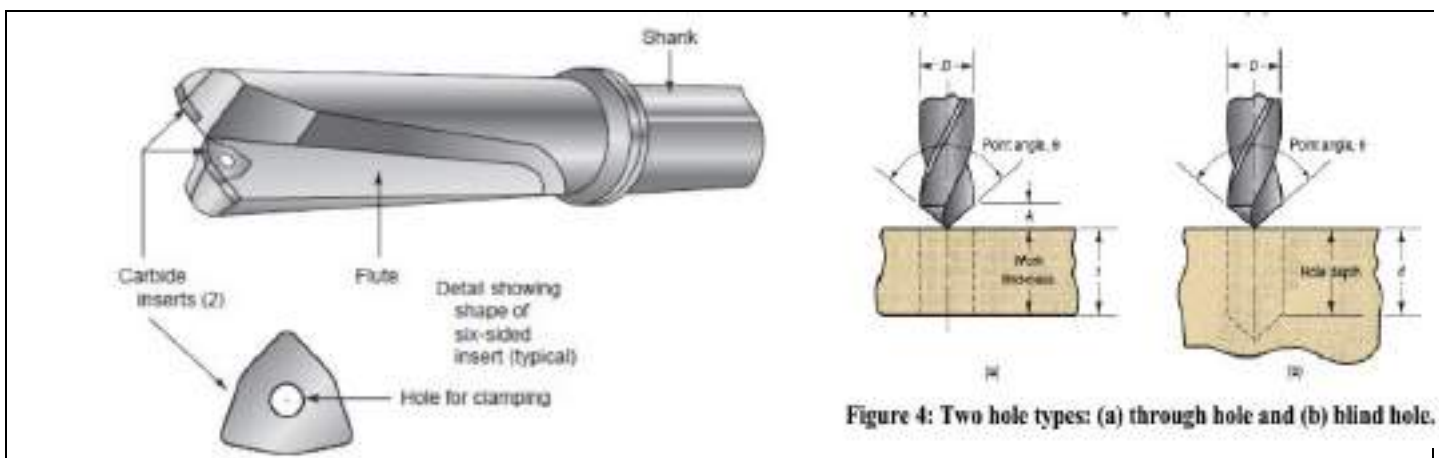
Two hole types: (a) through hole and (b) blind hole.
